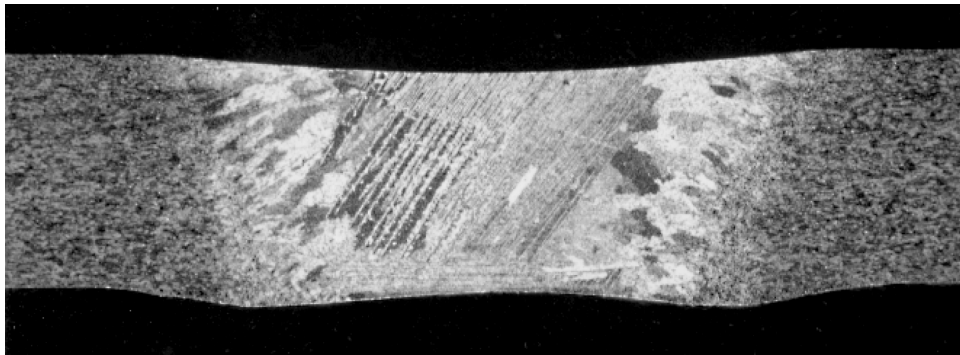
Al 2219 bead-on-plate weld (sample 1-6-E-10), $\times 12.5$.
